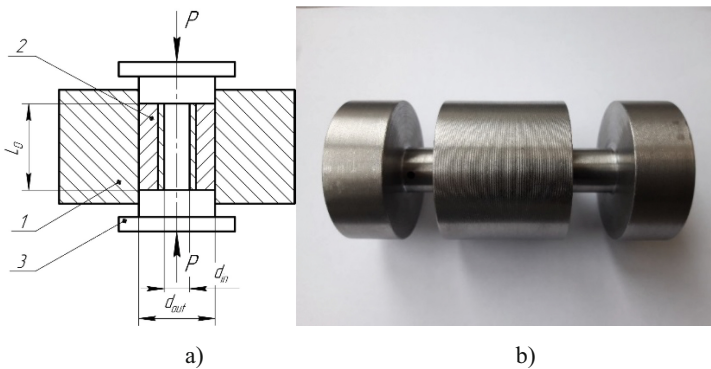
Device for compressing samples: *a* – device scheme; *b* – general view.
